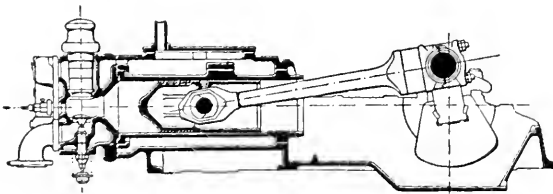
DEUTZ COMPRESSORLESS DIESEL ENGINE
